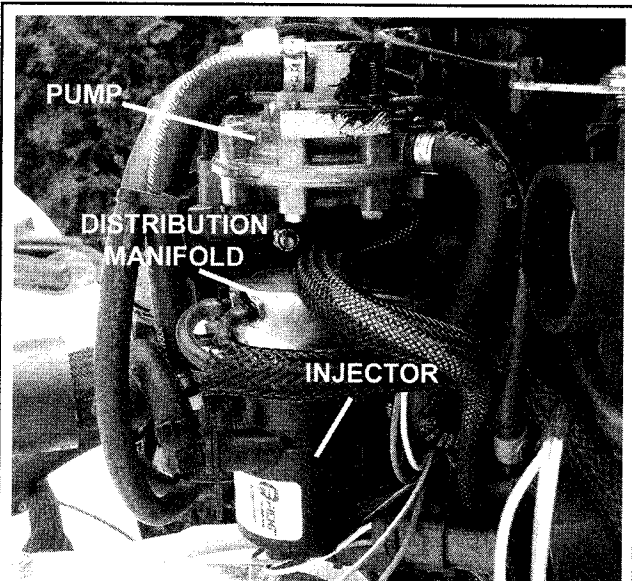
The oil pump, distribution manifold and injector are all normally removed as an assembly
